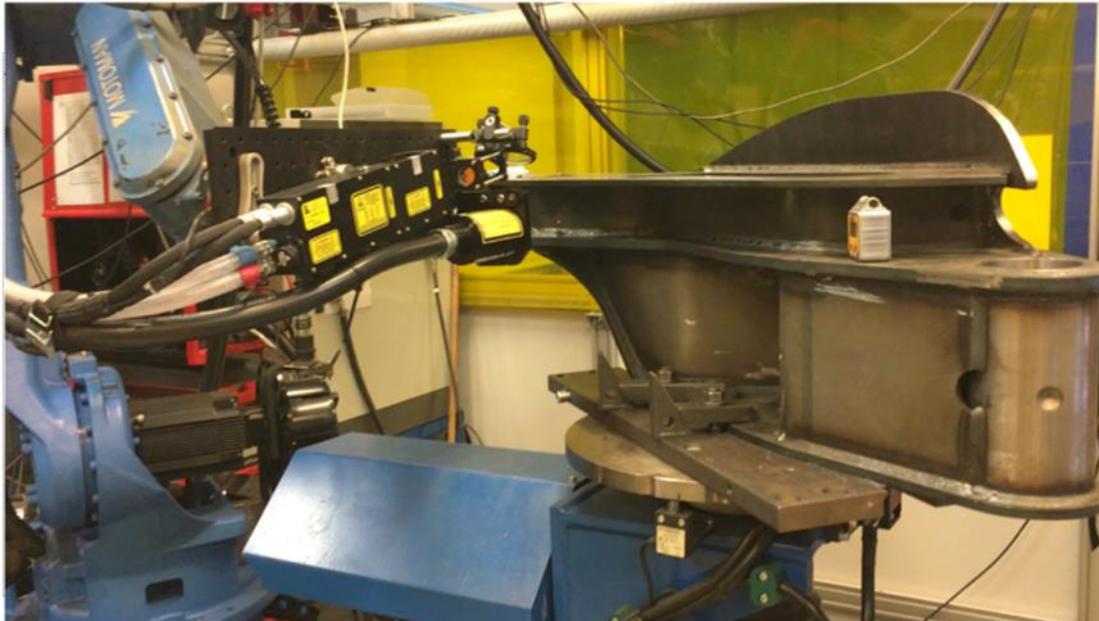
The integration of the LUS optics and measurement setup with an industrial robot, experiments in KIMAB:s welding lab in Kista late September 2016, also shown is a component with fillet welds from HIAB.
